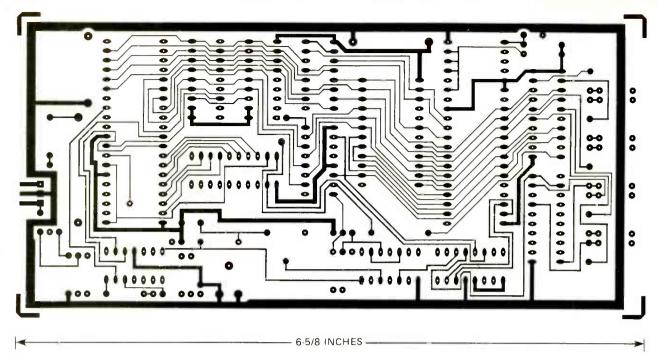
PC BOARD FOR TITLER is double sided. This is the top, or component, side of board.
